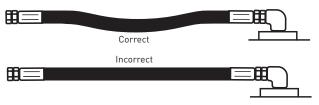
HOSE AND MACHINE TOLERANCES
